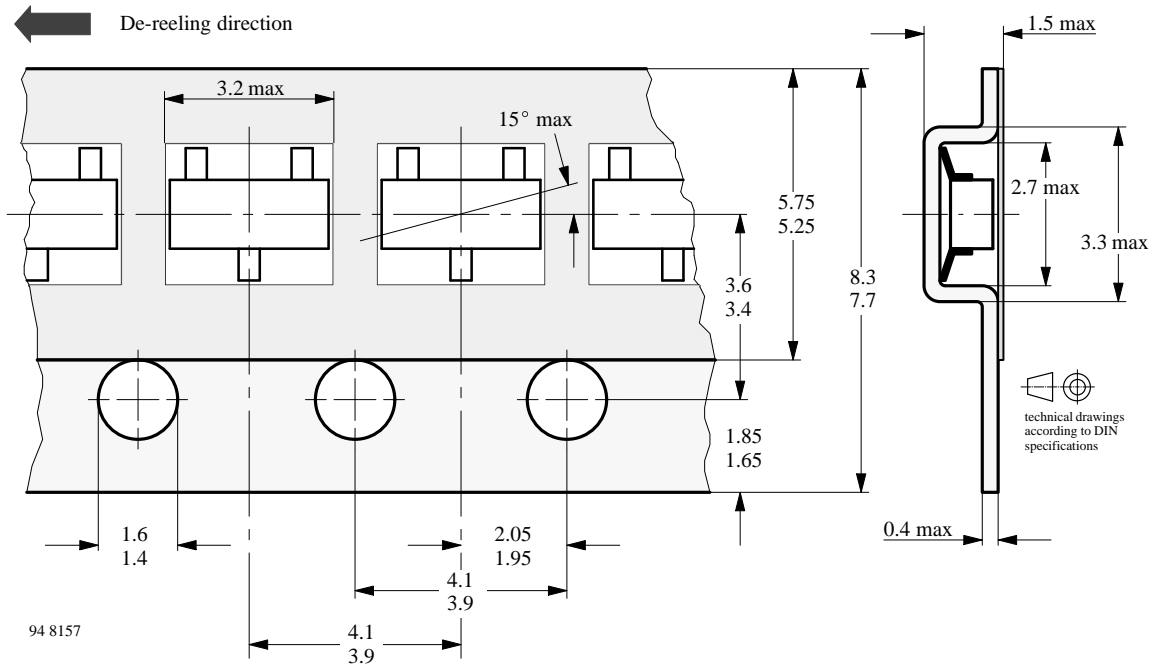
Tape dimensions in mm for SOT 23. The mounting side of the components is oriented to the bottom side in the tape.
